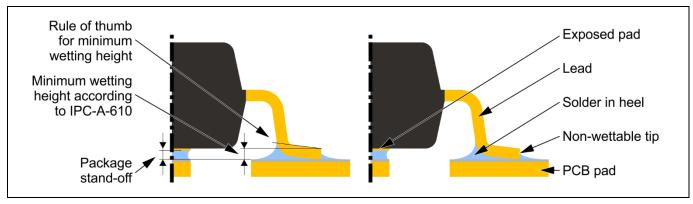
Schematic depiction of a QFP mounted on a PCB. There are two critical parameters to consider. First is the package stand-off between the landing plane of the exposed pad and the copper plane of the PCB. The second is the pad extension for optimal solder fillet formation at the gullwing heel according to the IPC-A-610 [6].
